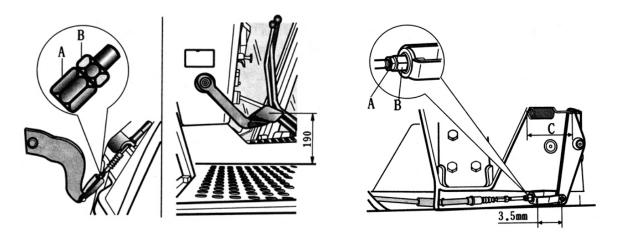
Adjustment on master clutch Fig.5-10 Adjustment on PTO shaft clutch If master clutch cannot be disengaged completely because clutch pedal is too high or clutch pedal has an insufficient stroke, do adjustments as the following steps:
